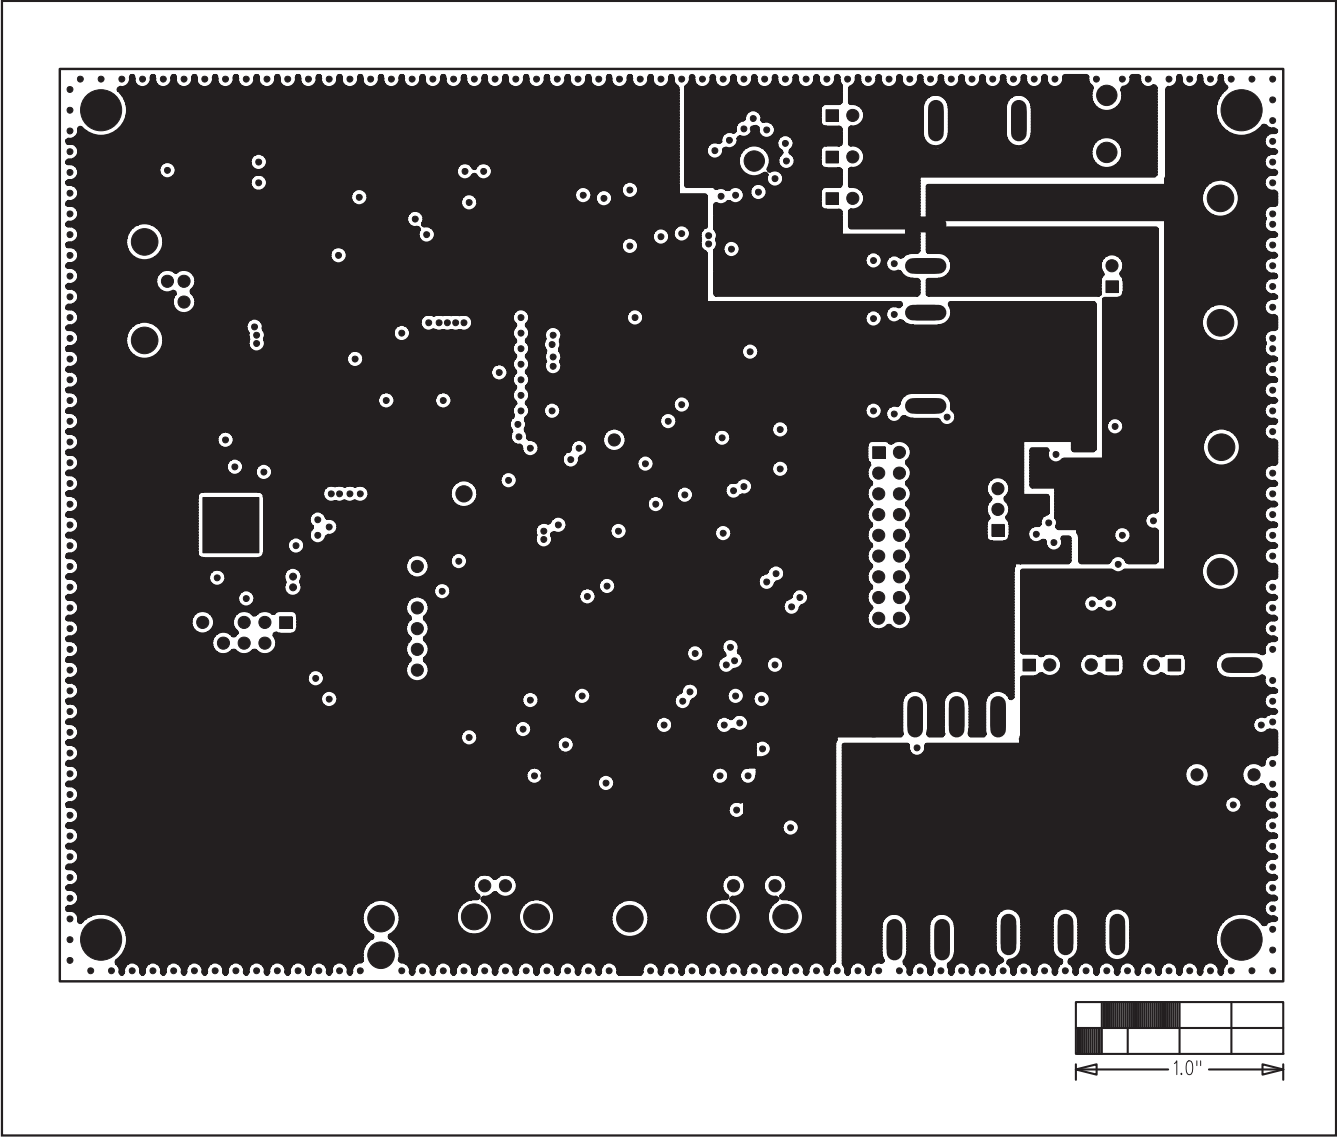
MAX9856 EV Kit PCB Layout—Inner Layer 2
